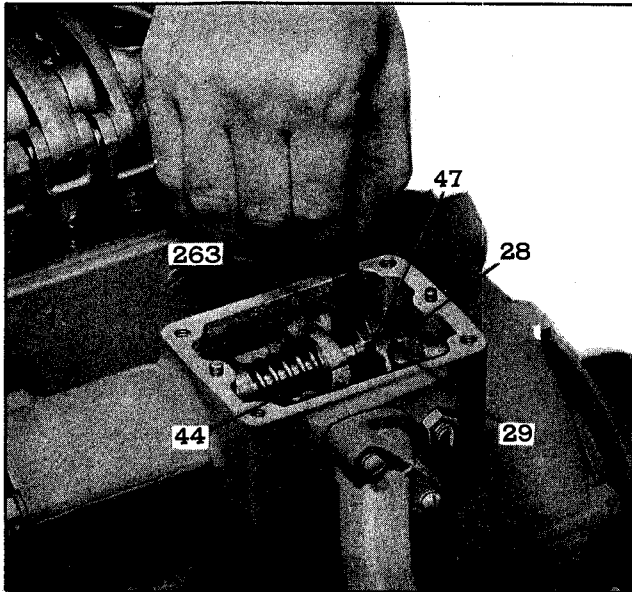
Adjusting Governor Gap—Tool J 5407.
